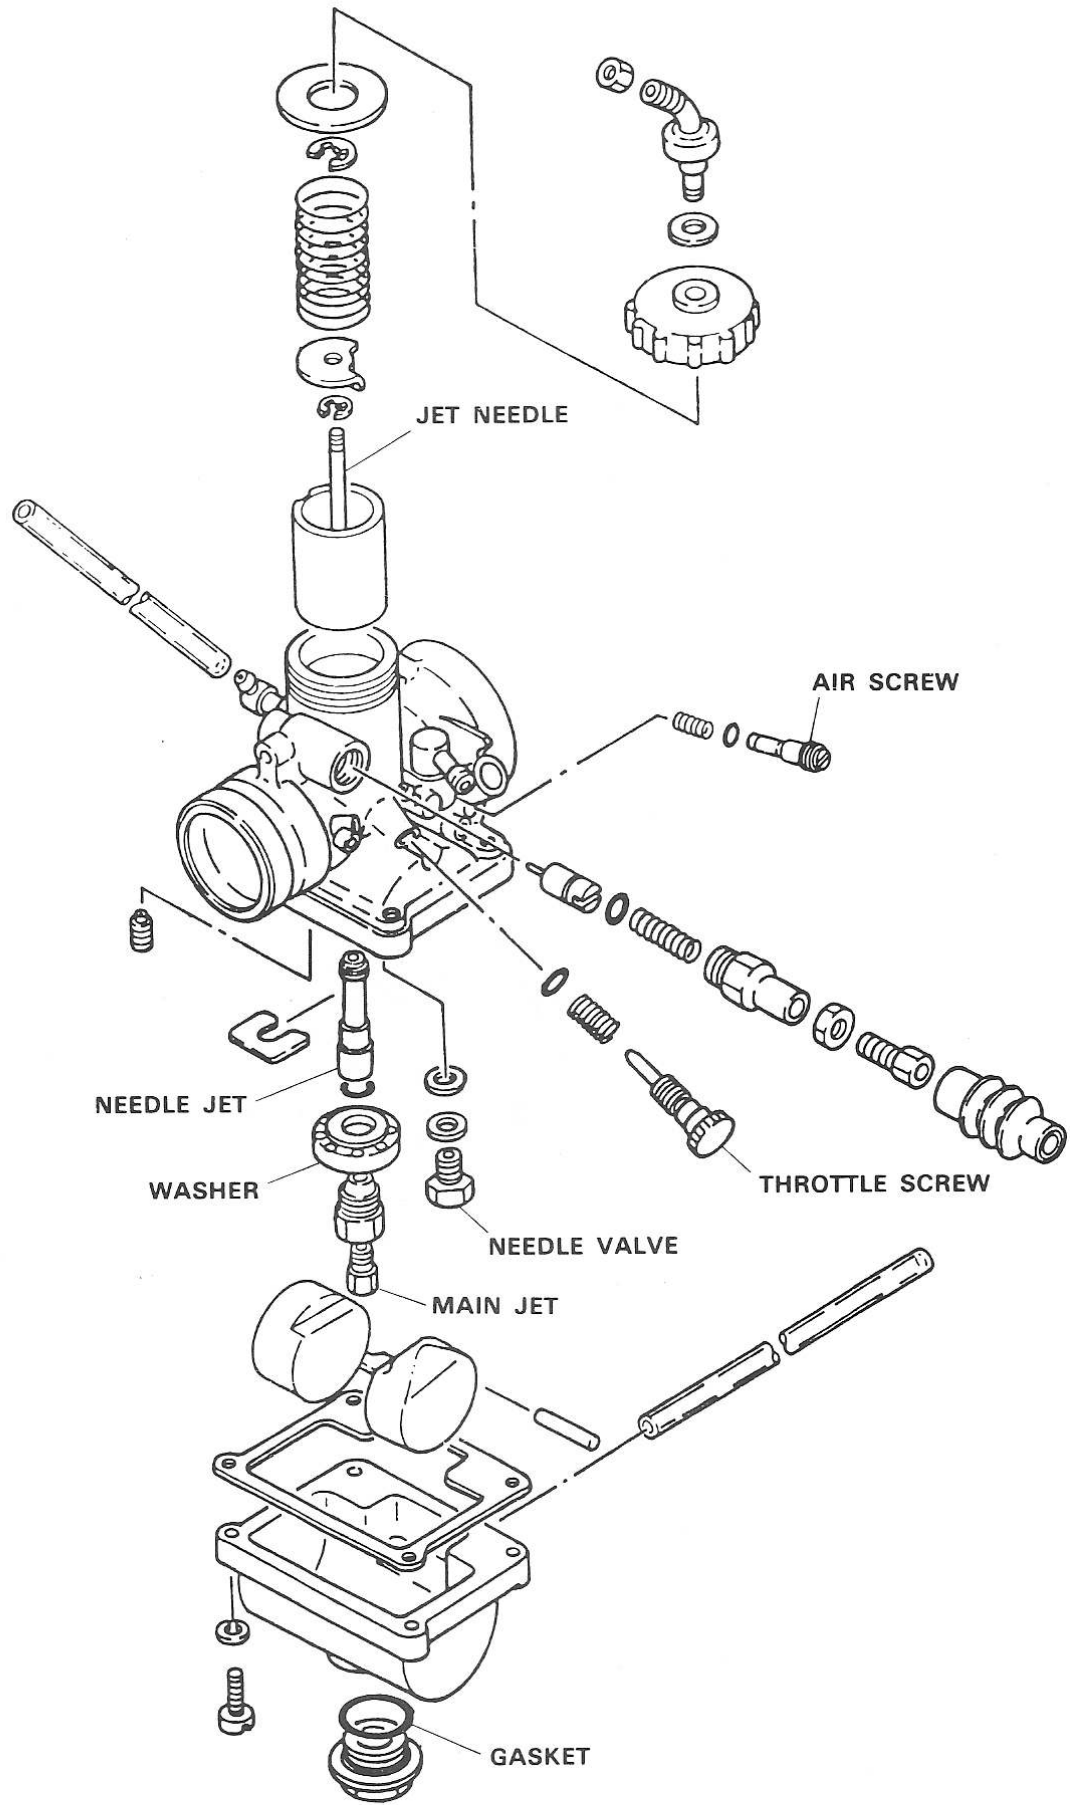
YT 175 carburetor components — exploded view (Sec 5)
